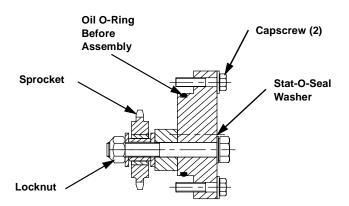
ECCENTRIC VERNIER - CHAIN IDLER SPROCKET (SELF-ALIGNING SPROCKET)
